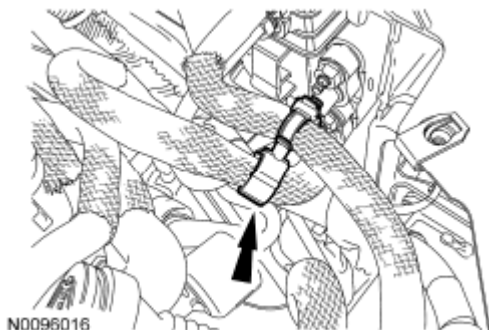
Locating Coolant Vent Hose Retaining Clip
